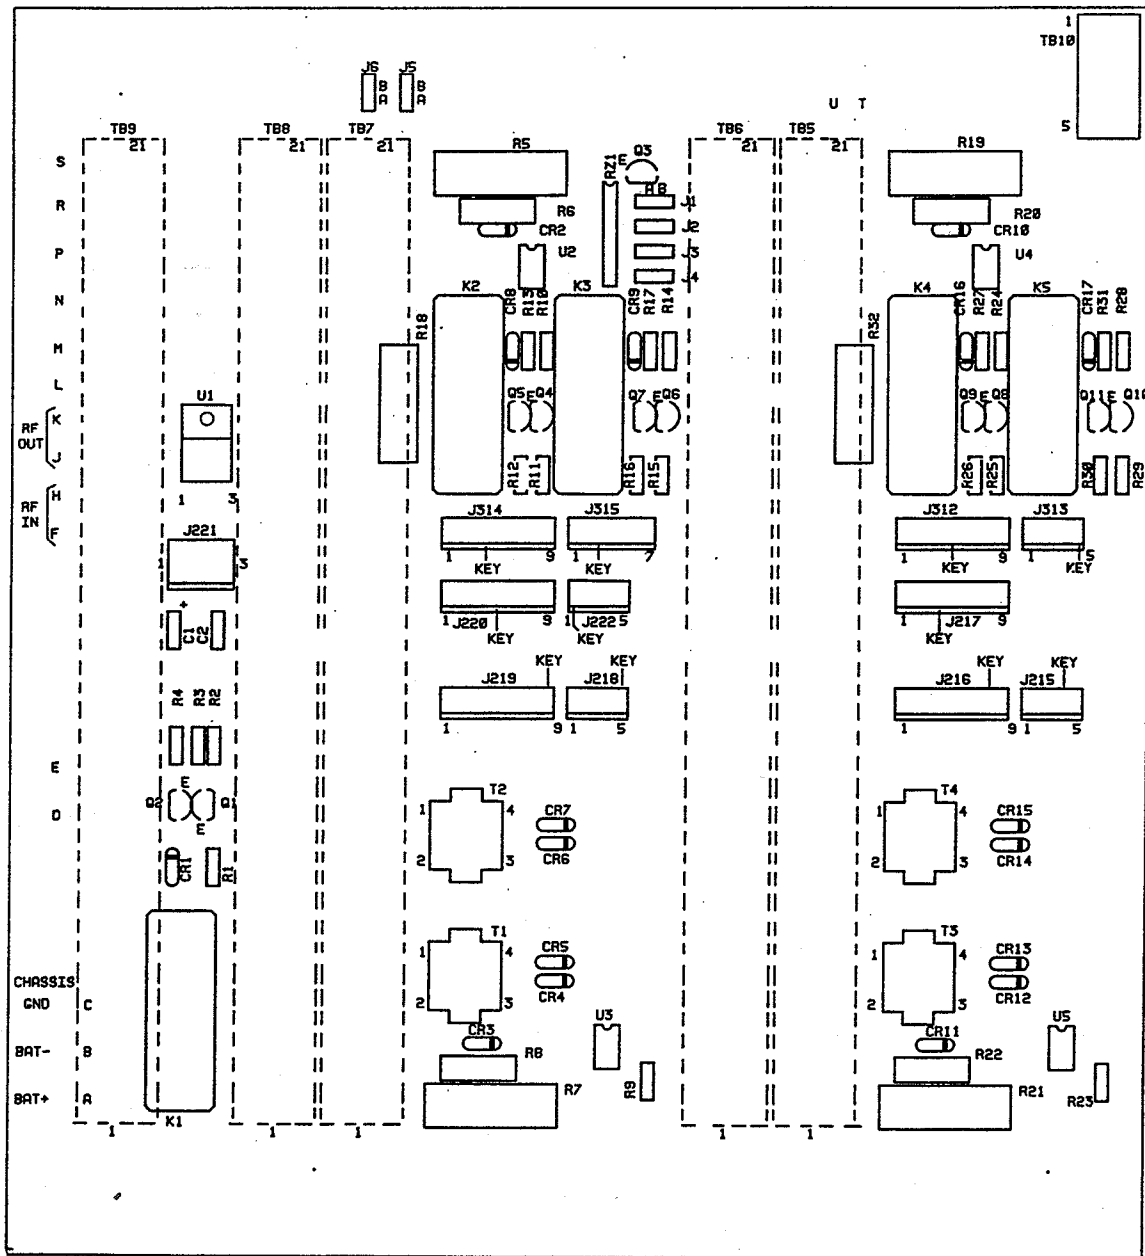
Component locator drawing, RFL 95 PWR I/O INT Power Interface Module
